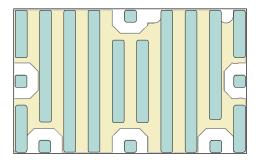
Solder Stencil Overlaid on ACFM-7101 Bottom Metal Pattern.
